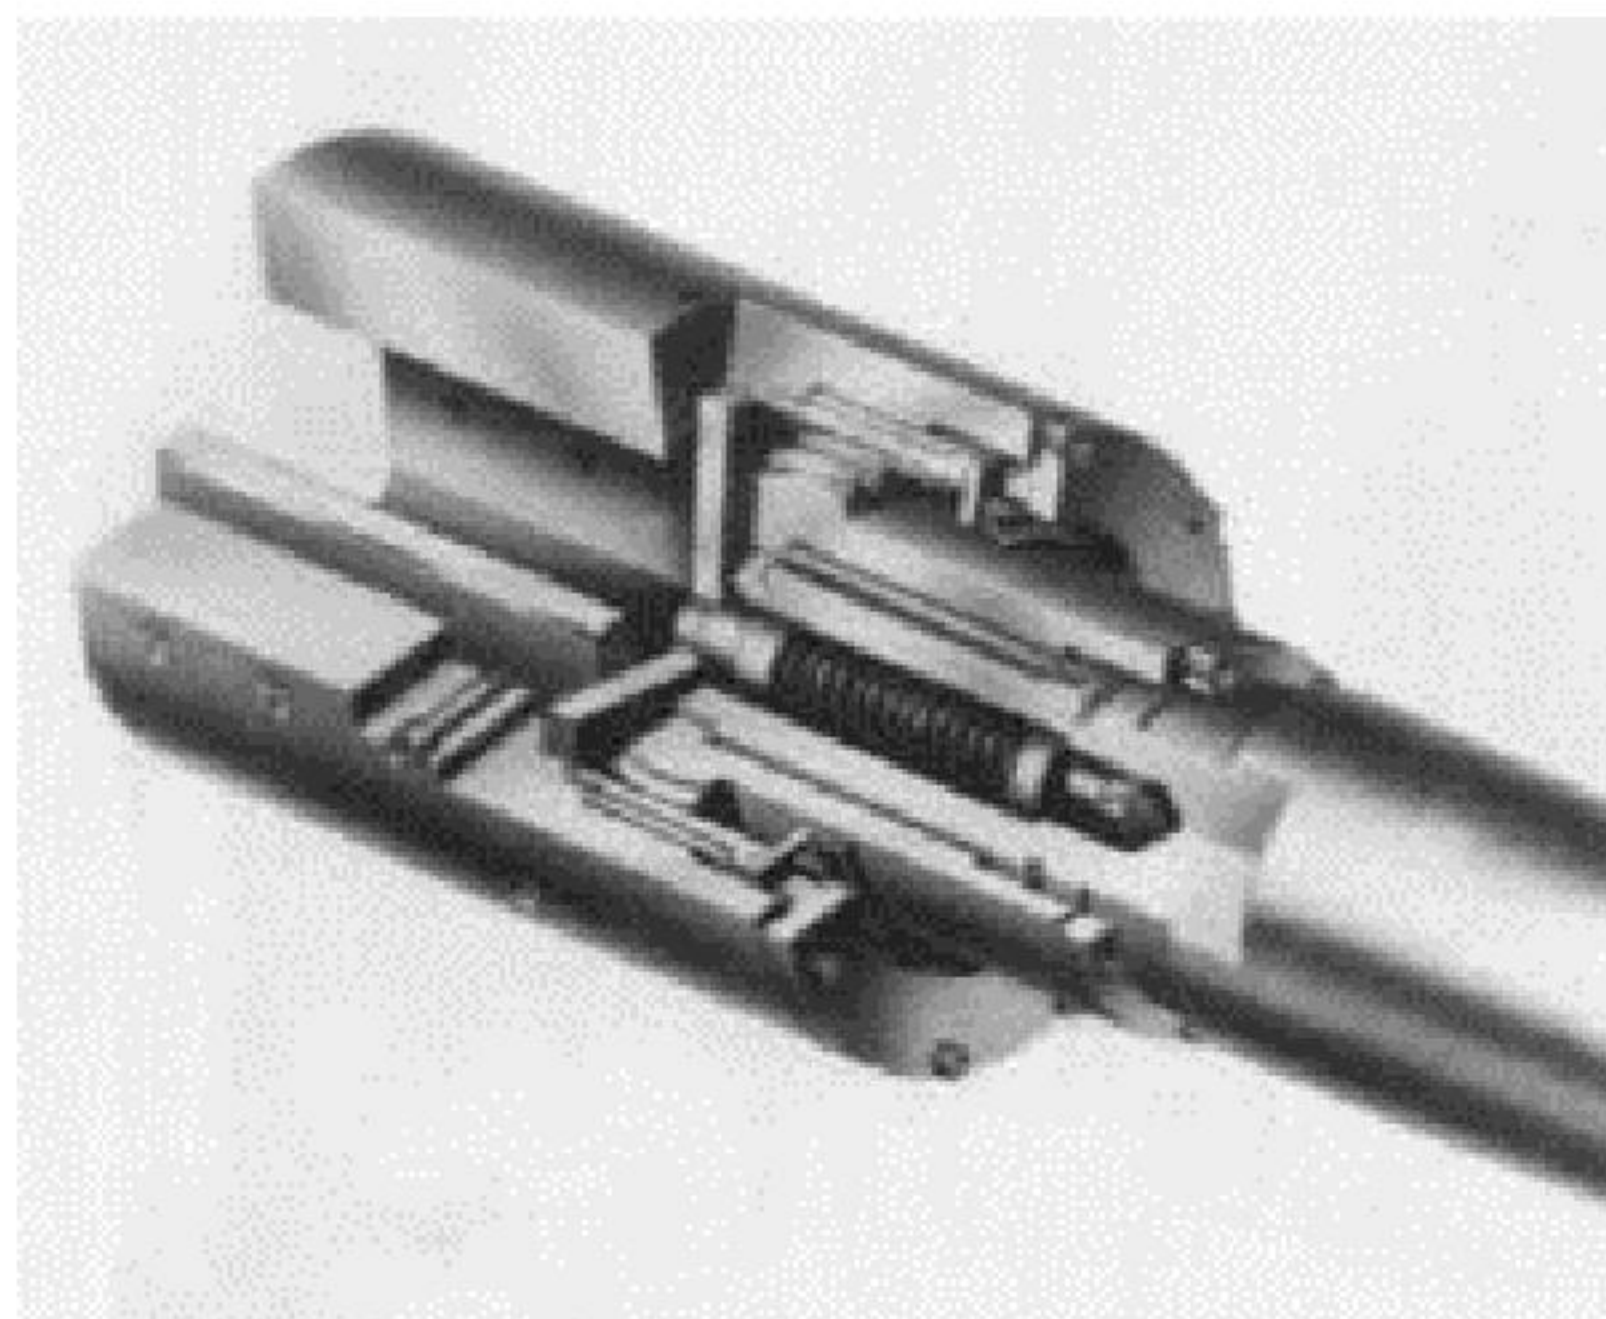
Gear-tooth coupling, spindle type. (*Zurn Industries, Inc.*)
